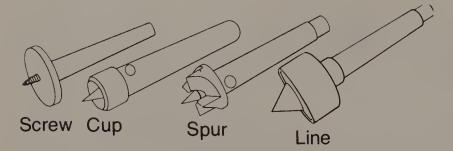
The various centers used in the head of the lathe to hold the workpiece.
